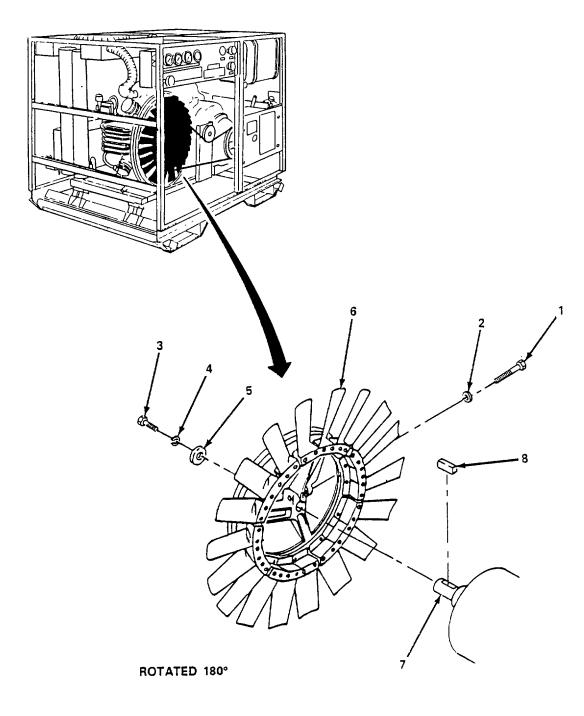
Compressor Flywheel/Fanwheel Assembly, Replace.
